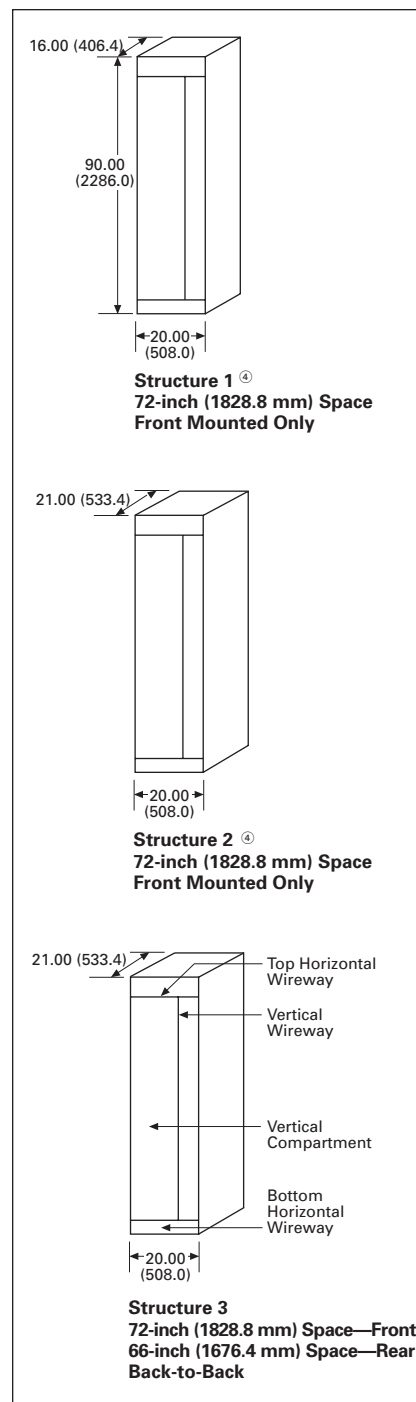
Structure—Dimensions in Inches (mm)
